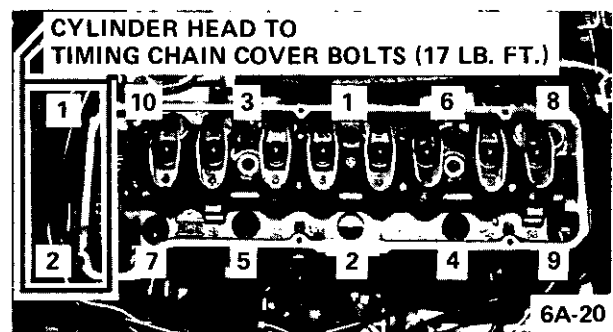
A-20 Cylinder Head Bolt Tightening sequence
